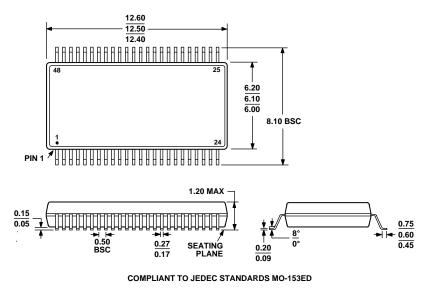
48-Lead Thin Shrink Small Outline Package [TSSOP] (RU) Dimensions shown in millimeters
